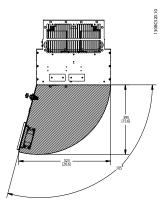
Front Clearance of IP21/IP54 Enclosure Type, Frame Size D2h, D7h, and D8h.
